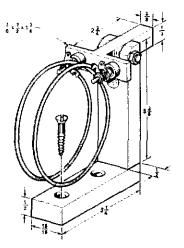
The variable link with dimensions for construction of the coil assembly. The two-turn 80-meter link is shown installed.
